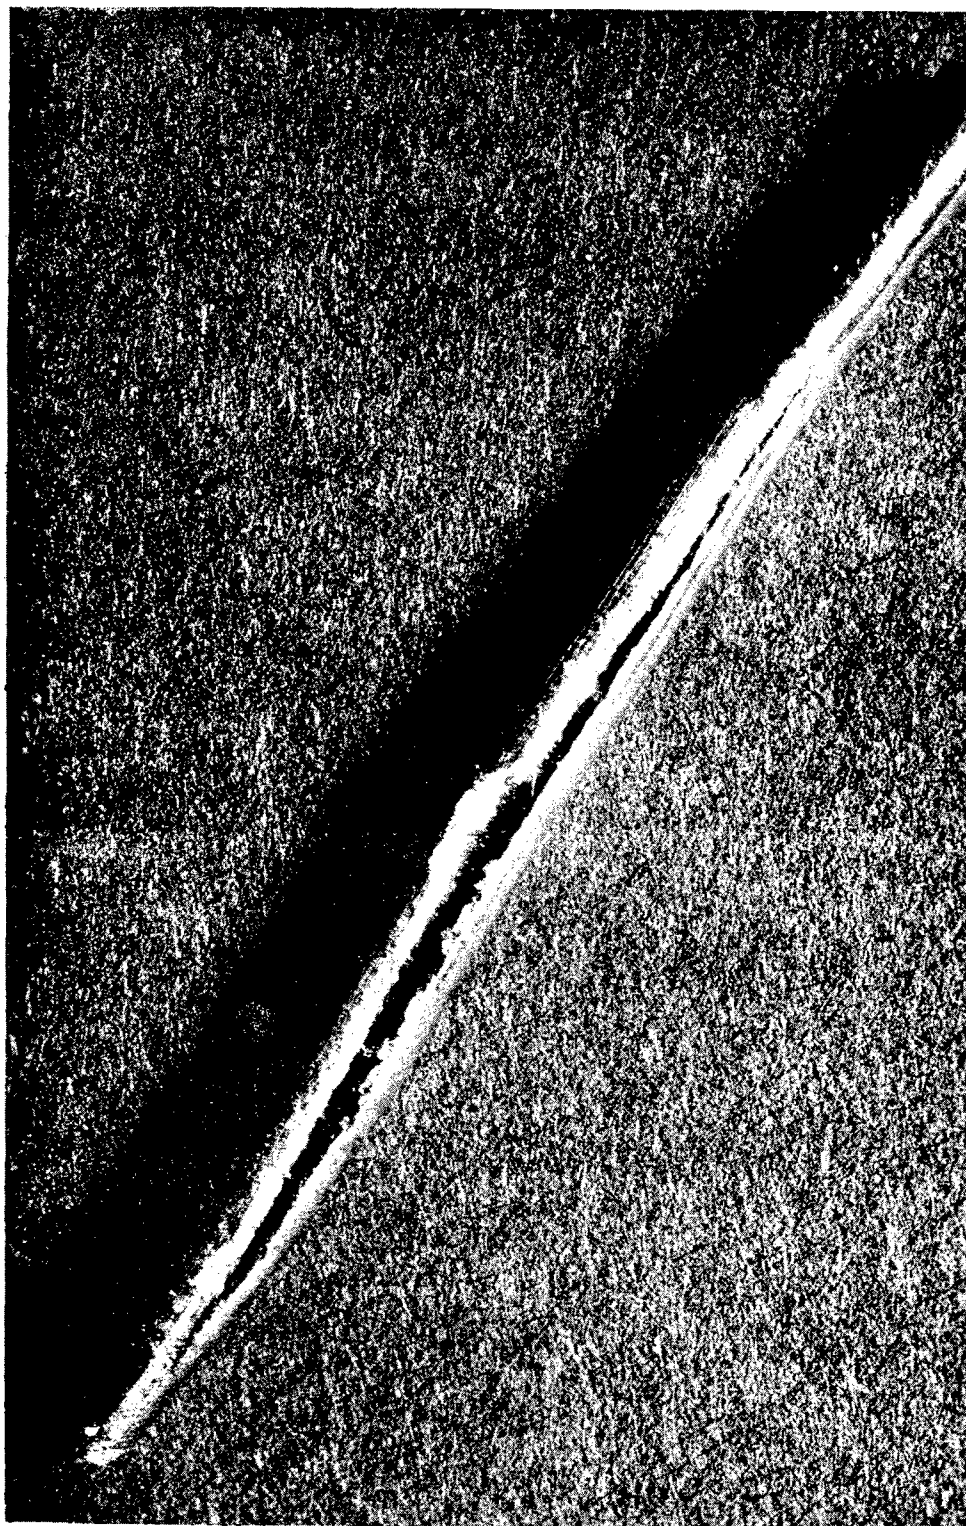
Right Pin - Fluid-Cooled Turbine Blade - Test Specimen.
